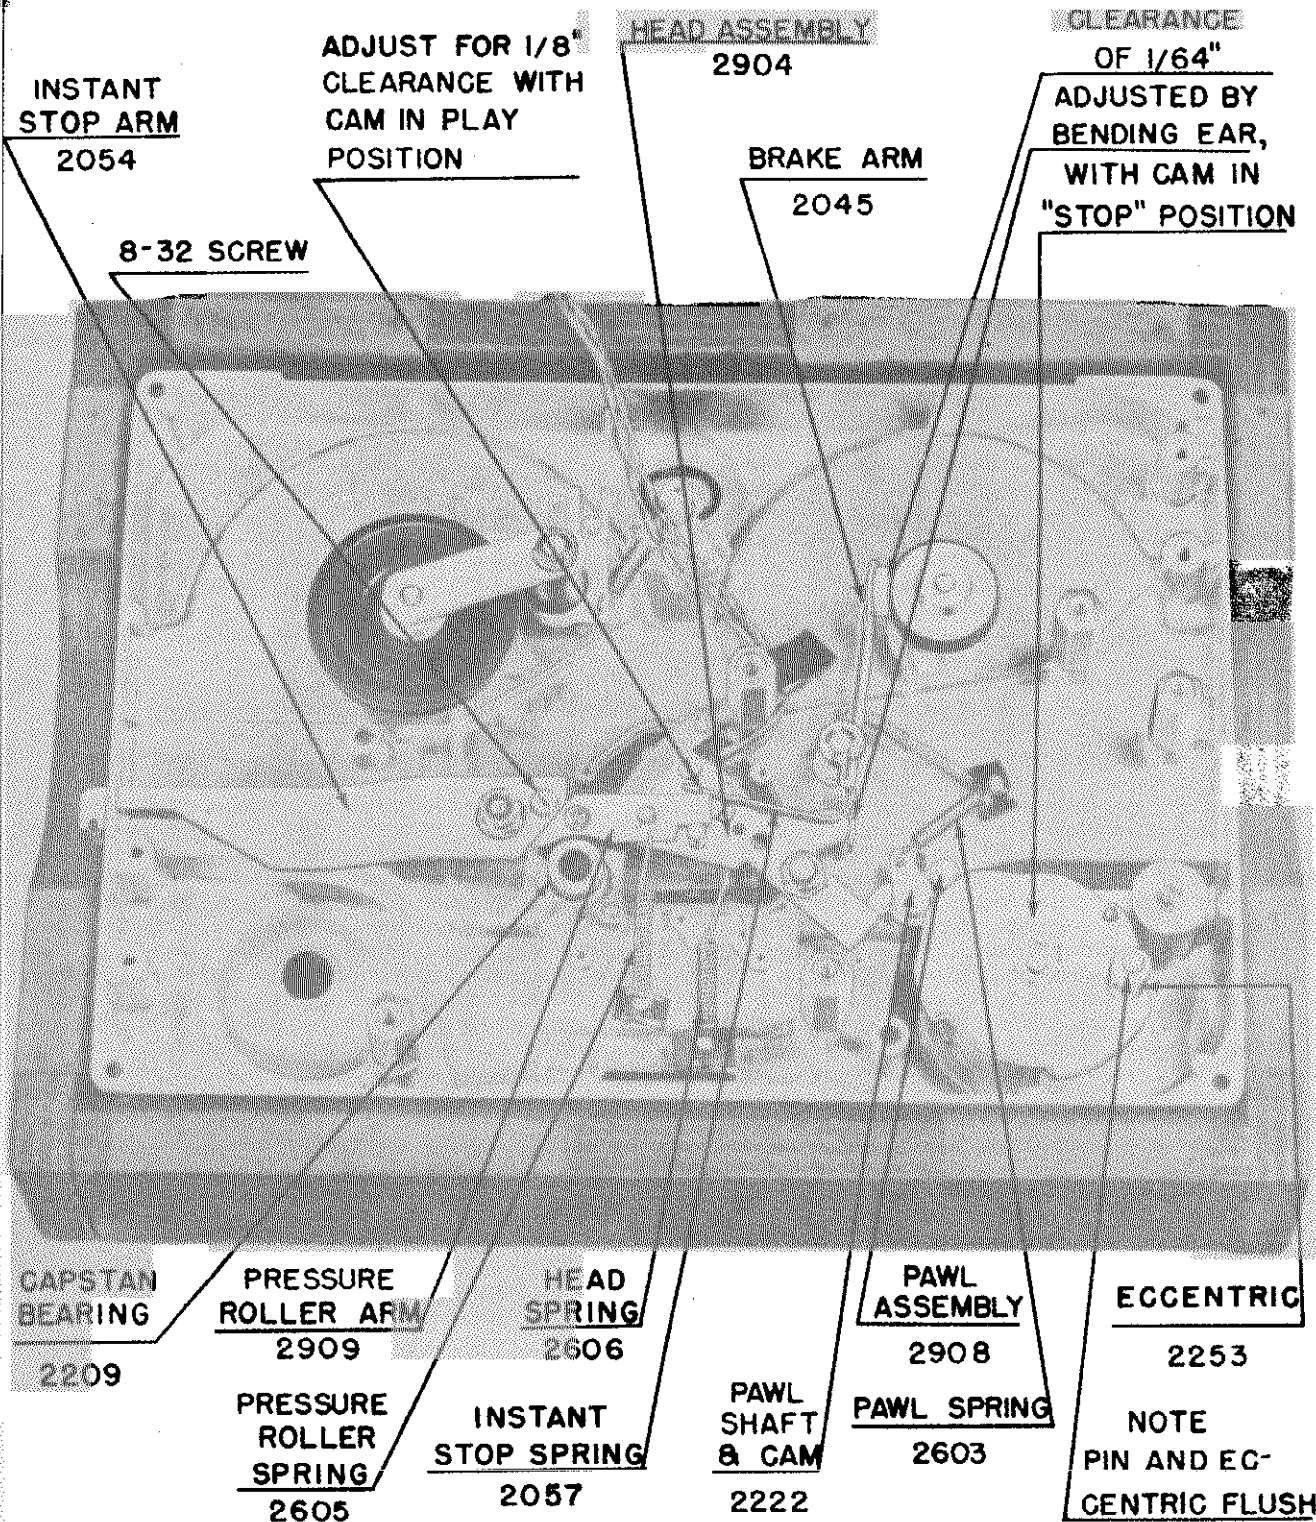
Bottom View of Recorder After Removing Flywheel Assembly.
